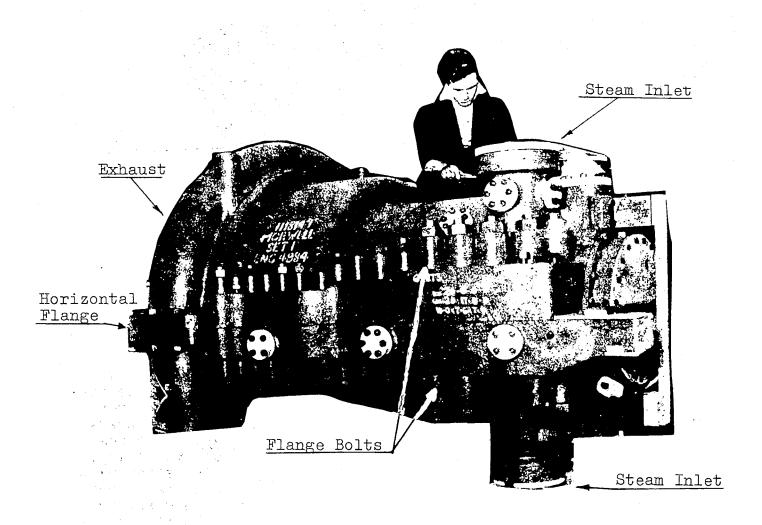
View of bare turbine casing with upper and lower halves bolted together. This particular casing is ready for pressure testing in the manufacturer's shops.
